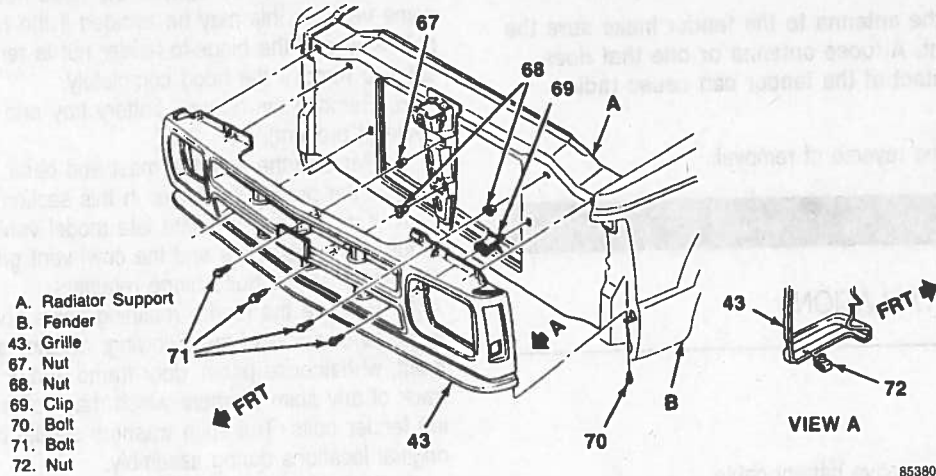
Exploded view of a late model composite grille/headlight bezel assembly
